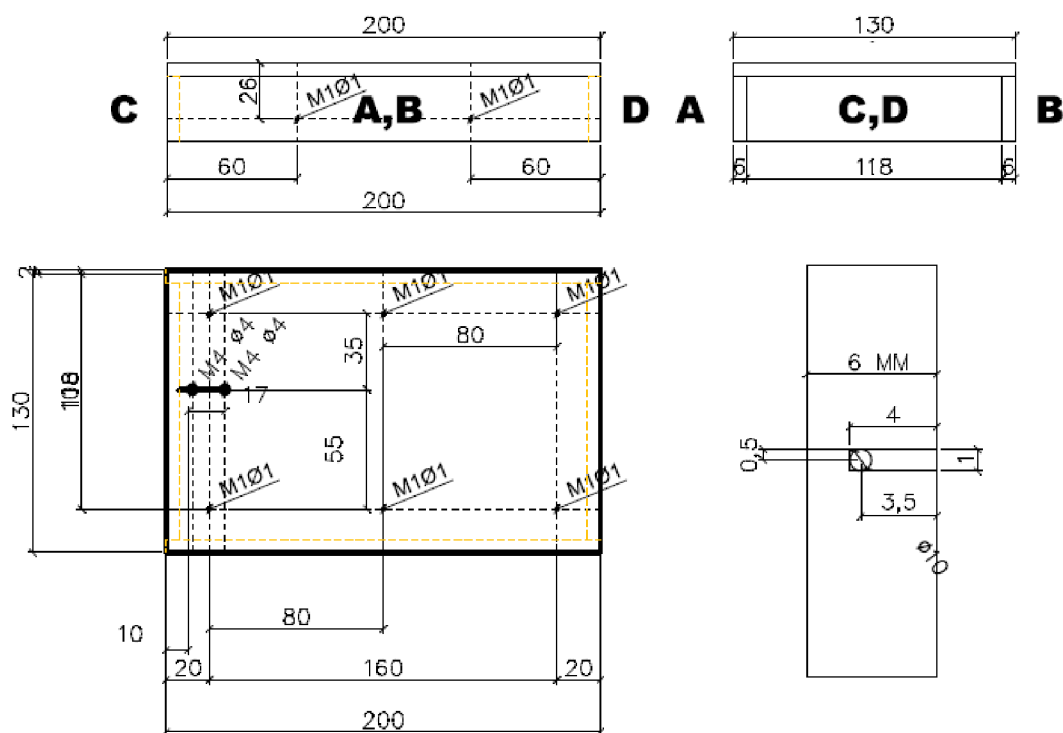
Technical drawings describing dimensions of the phantom and placement of the tantalum beads.
